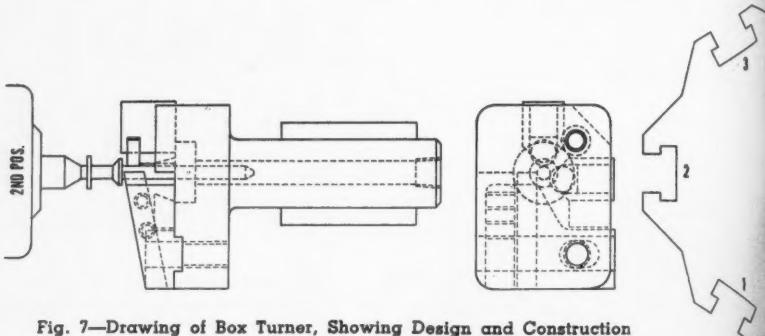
Drawing of Box Turner, Showing Design and Construction
